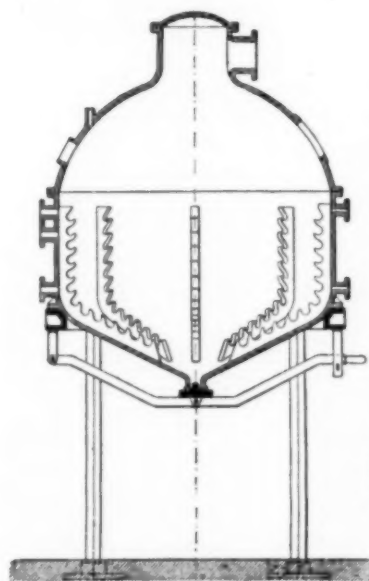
EVAPORATOR MADE OF THREE PARTS.
